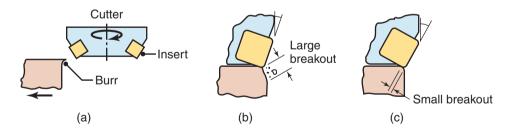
Edge defects in face milling: (a) burr formation along workpiece edge, (b) breakout along workpiece edge, and (c) how it can be avoided by increasing the lead angle (see also last row in Table 24.3).
